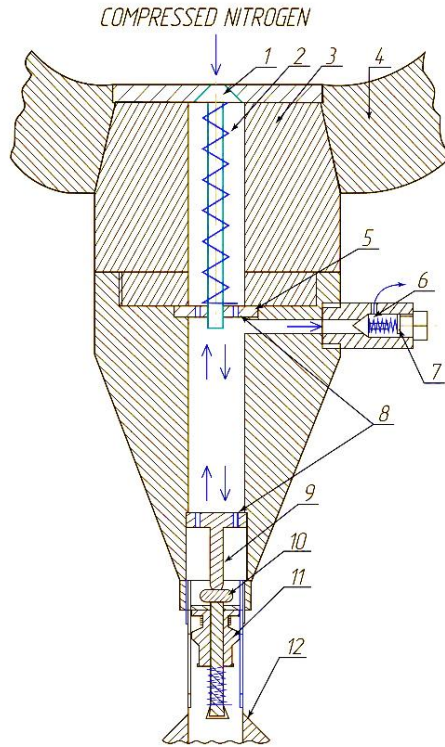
High-pressure reducer: 1 - cone valve; 2 - cone valve spring; 3 - upper part of the high-pressure reducer; 4 - the wall of the high-pressure cylinder body; 5 - spring stop with holes for gas; 6 - release valve; 7 - spring of the release valve; 8 - holes for air; 9 - tappet; 10 - slide-valve head; 11 - slide-valve; 12 - valve
